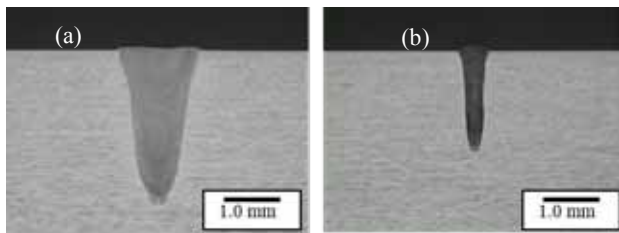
Cross-section view of A5052 with SM1kW fiber laser (a) 1m/min (b) 10/min
